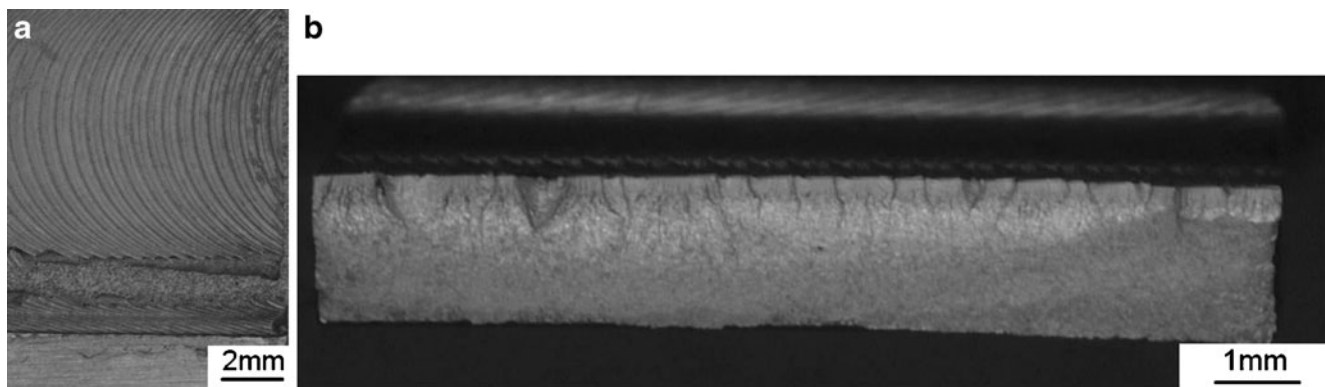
Typical fracture surface in case multiple cracks form at tool mark. a Fracture location. b Fracture surface
